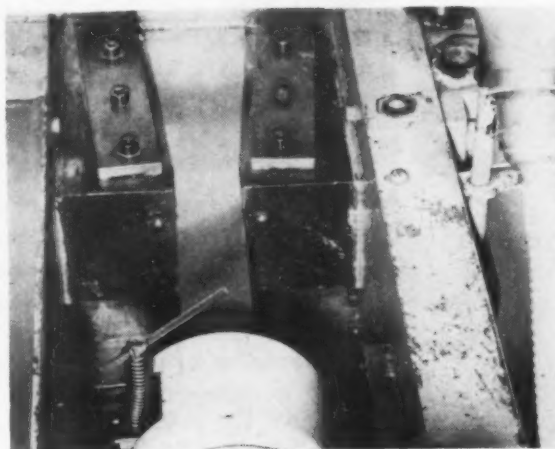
Closeup of sample in wedge draw die. Hold-down block has been removed so sample may be seen.
